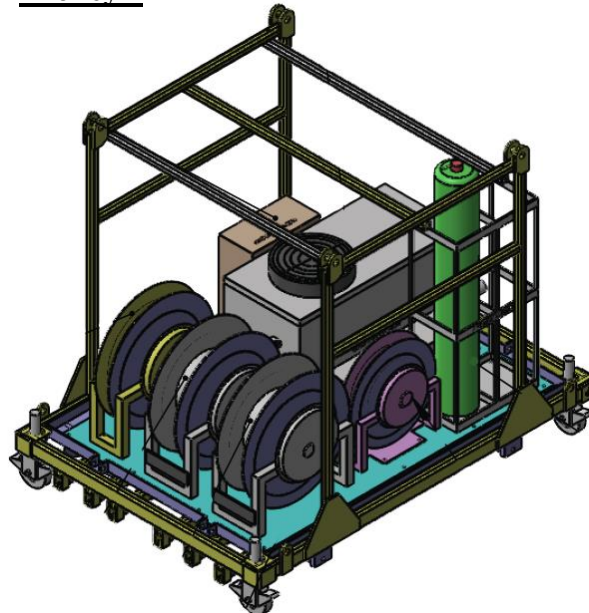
Laser cladding machine design CAD models [Track Trolleys 1 and 2]
